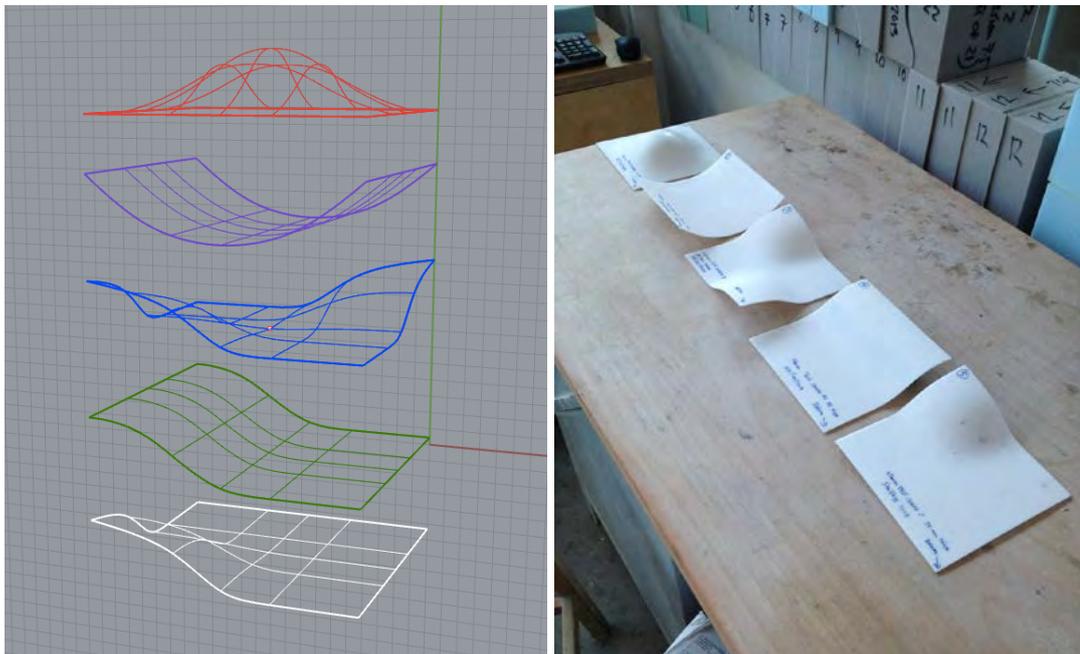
The test shapes designed in Rhino and physicalized via 3D printing to aid visual inspection of the foam shapes, photo: T. Jørgensen, 2013.
